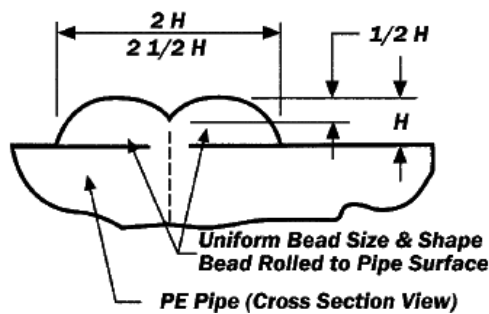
Butt Fusion Bead Dimensional Guideline (ASTM F2620-06)
